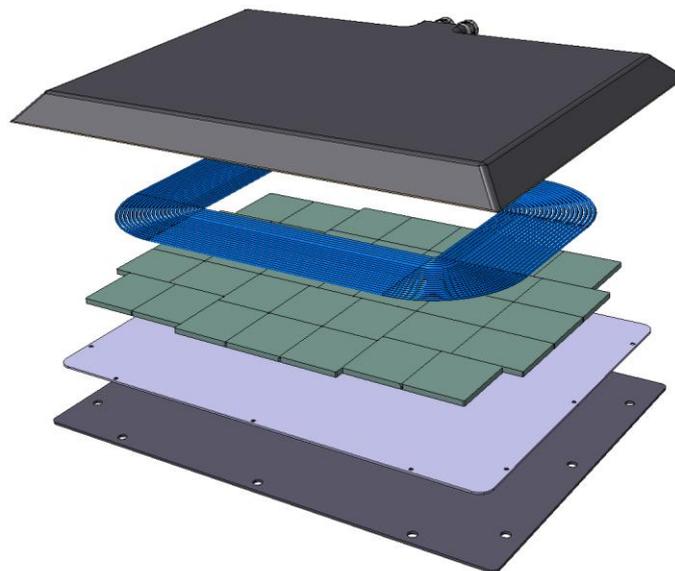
principle design of bottom plate (top to bottom: housing, coil, ferrite, alu plate, housing)
